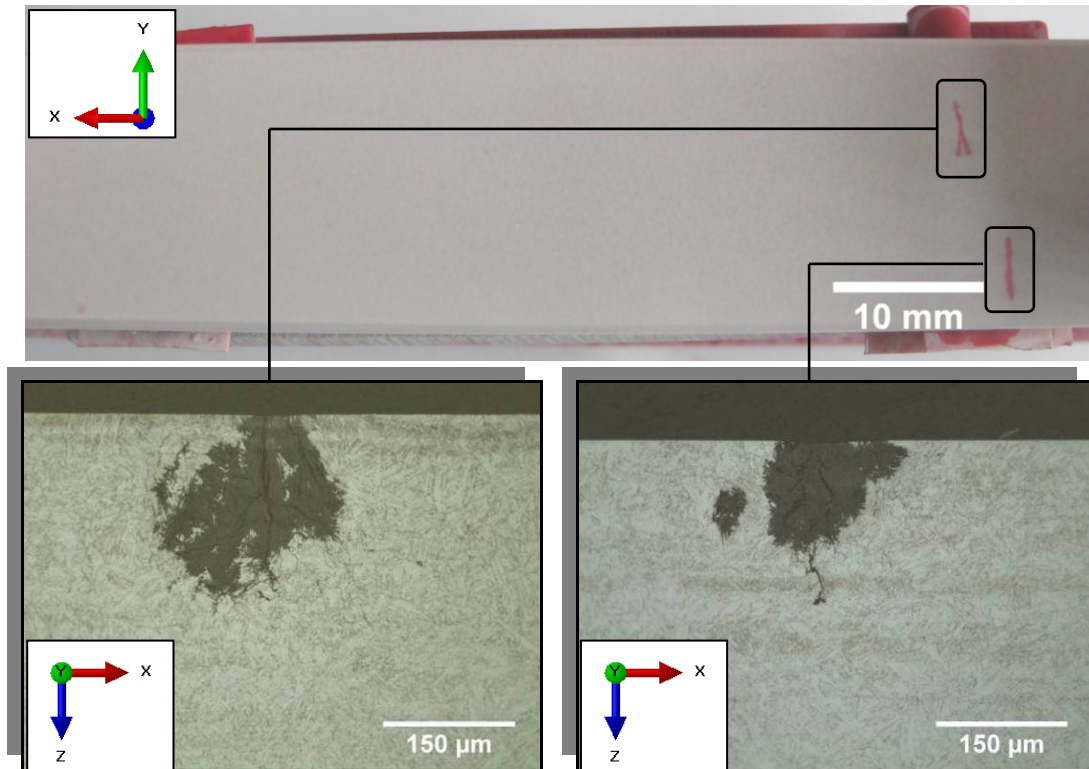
SSC cracks located at inner loading roller position on the tensile surface of fully-machined specimen P3 (Specimen tested in Produced Water at 24 °C and exposed to 69 mbar H₂S)
